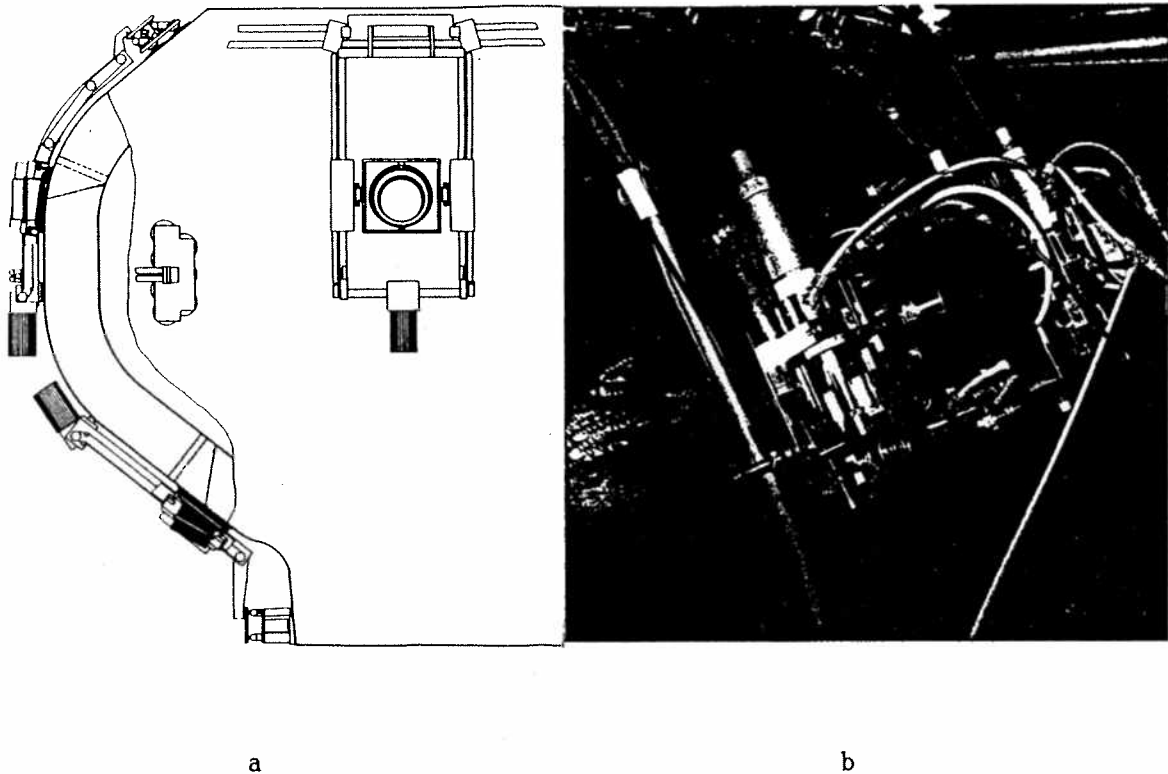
Dedicated Manipulator for Upper and Lower Weld Inspection (a).
